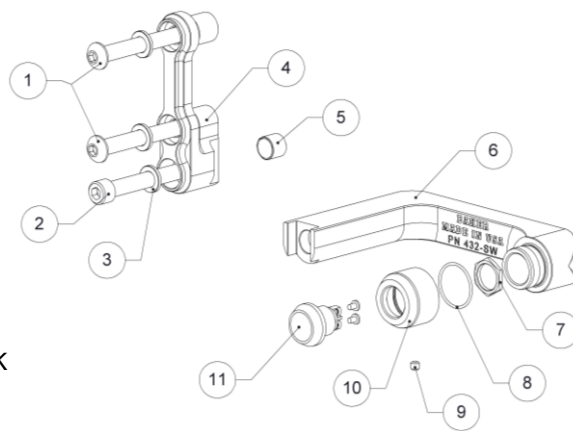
| SWITCH HOUSING DETAILED VIEW
